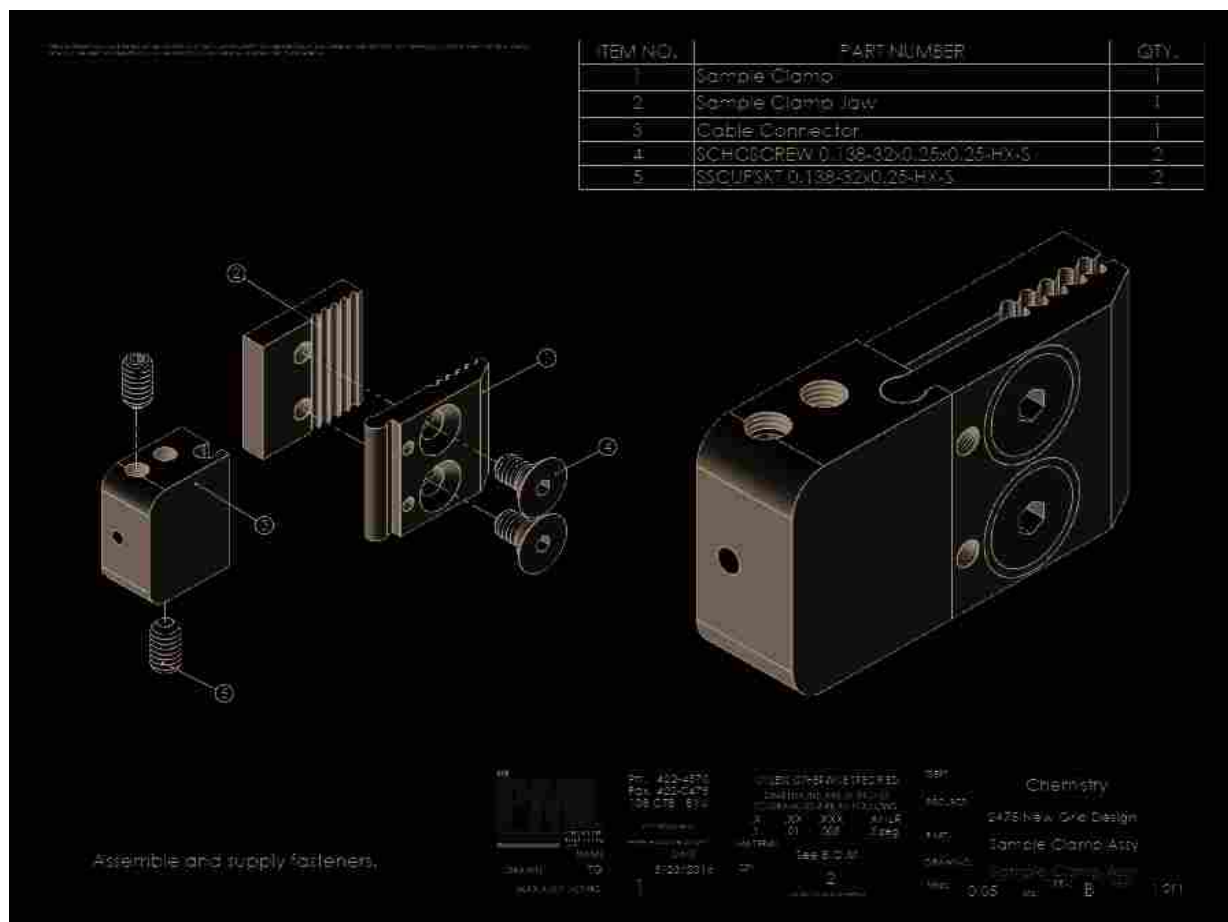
Assembly drawing of a sample clamp used with the live pull adapter for current sample mount.
